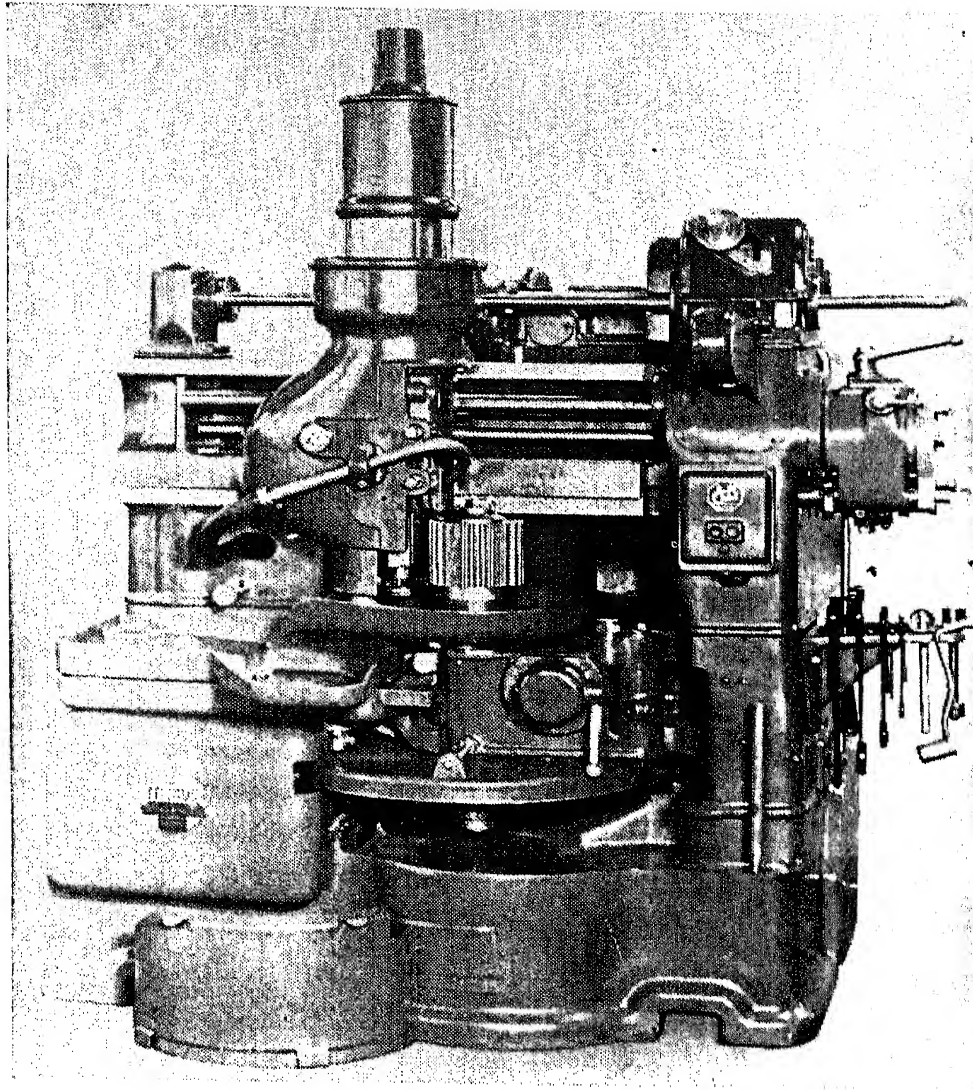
An 6A type Fellows gear shaper. (Courtesy The Fellows Gear Shaper Co.)
